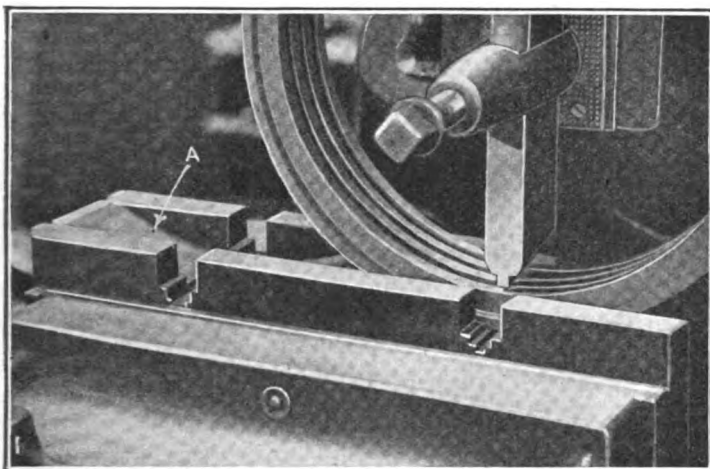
SPLITTING VALVE PACKING RINGS. FIG. 2. SPLITTING PACKING RINGS
